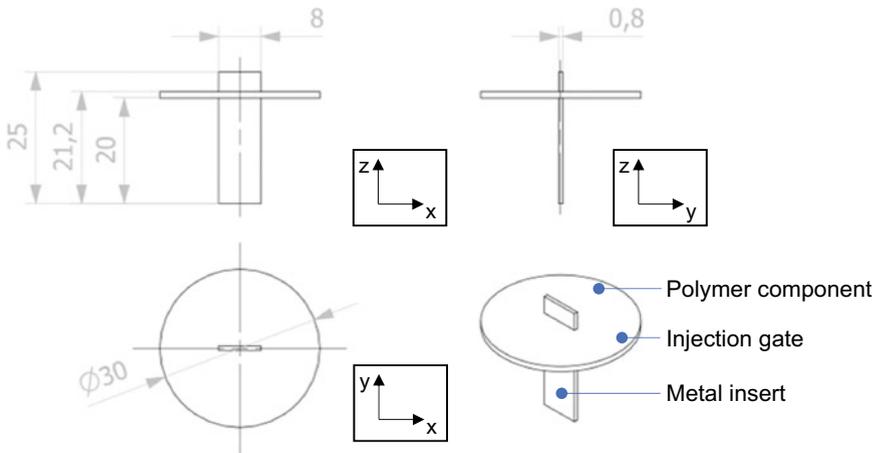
Hybrid test specimen in different drawing views (dimensions in mm)
